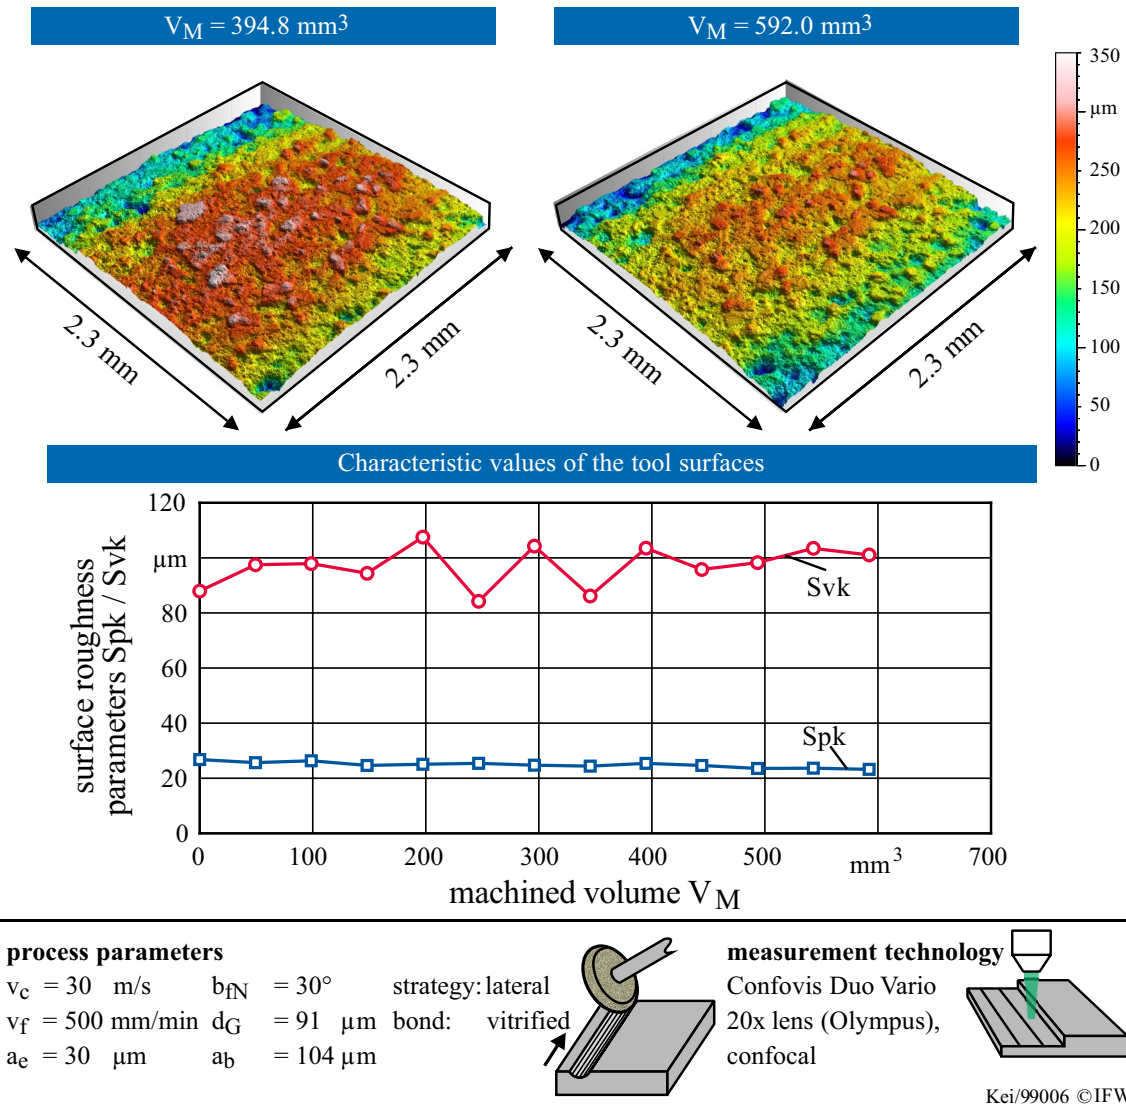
Surfaces of the AM toric grinding pins after a machined volume of $V_M = 394.8$ mm³ and $V_M = 592.0$ mm³
